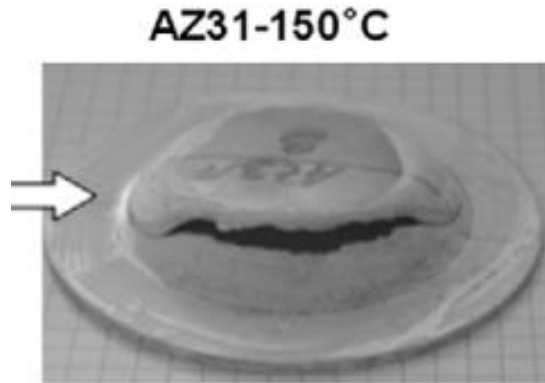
Mg AZ31 Drawing at 150°C causing failure during the cup drawing process [9]
